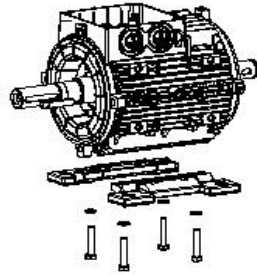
The feet on foot-mounted motors bolted onto the motor casing
